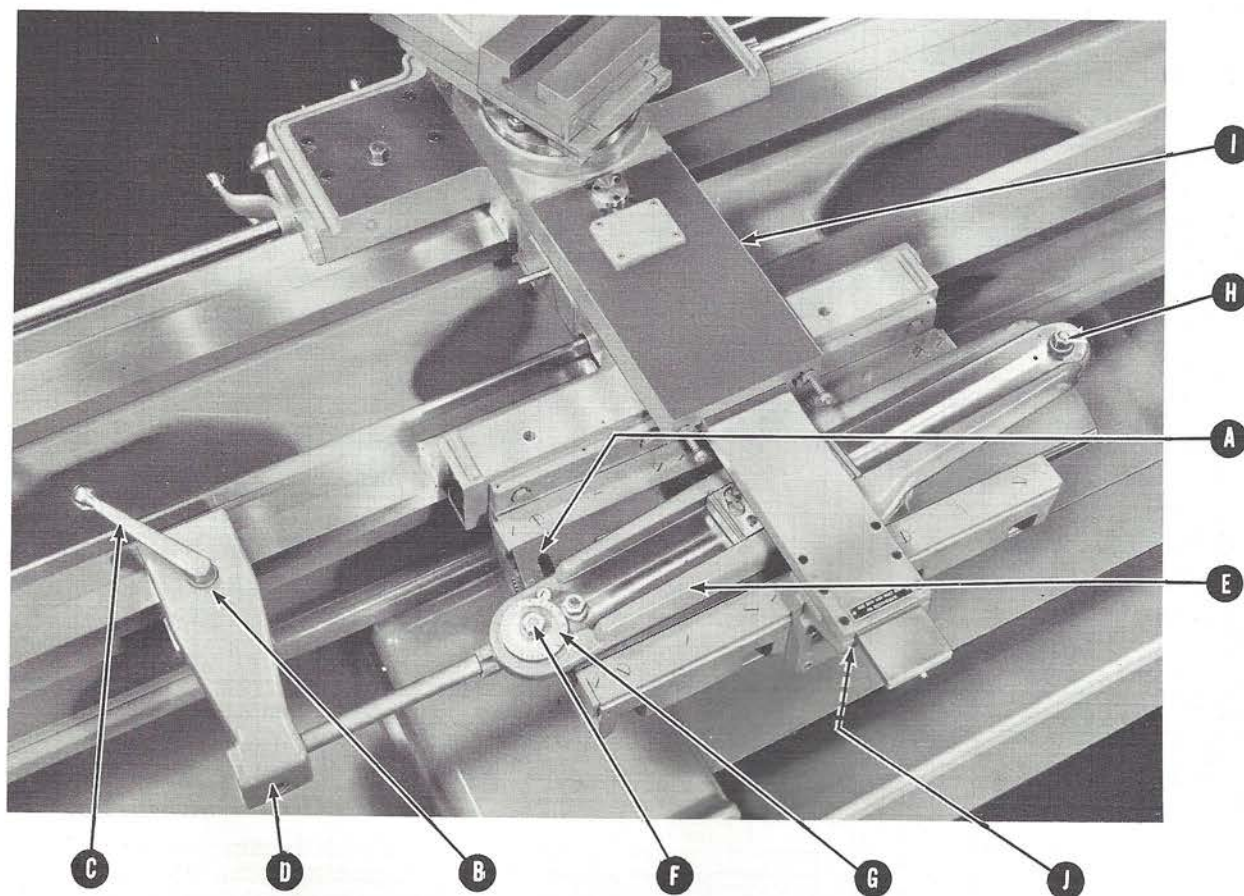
TOP VIEW OF MONARCH BALL BEARING TAPER ATTACHMENT
